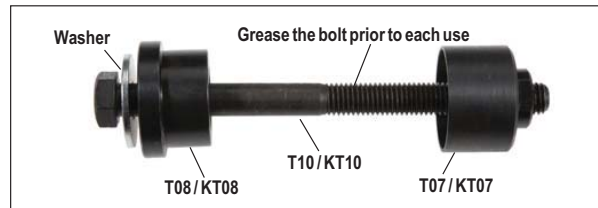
SHORT GUIDE PIN BOOT INSTALLATION TOOL
